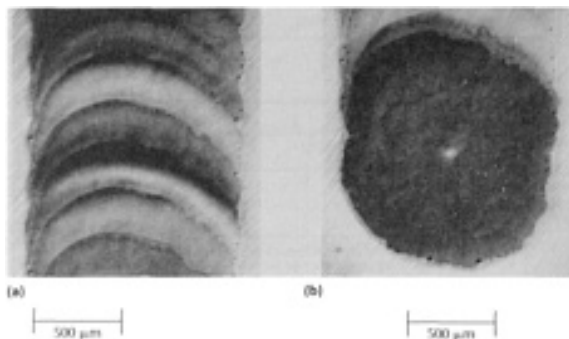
SEM SURFACE IMAGE OF PULSED ND:YAG LASER WELDS IN LOW-BORON CONTENT ALLOY 214. (A) SOLIDIFICATION CRACKING. (B) CRATER CRACKING
